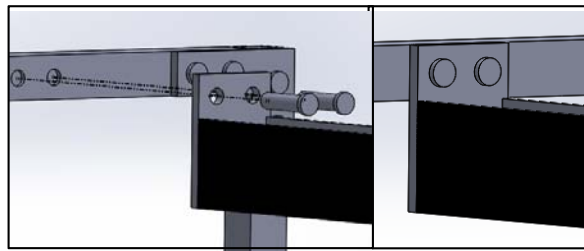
Trough is bolted to the upper cross bar and the end of each stand. Left, shows the alignment. Right, shows the assembled view
